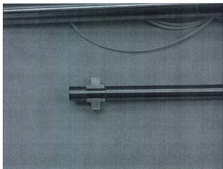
Thrust shaft keeper mounted to thrust shaft.
